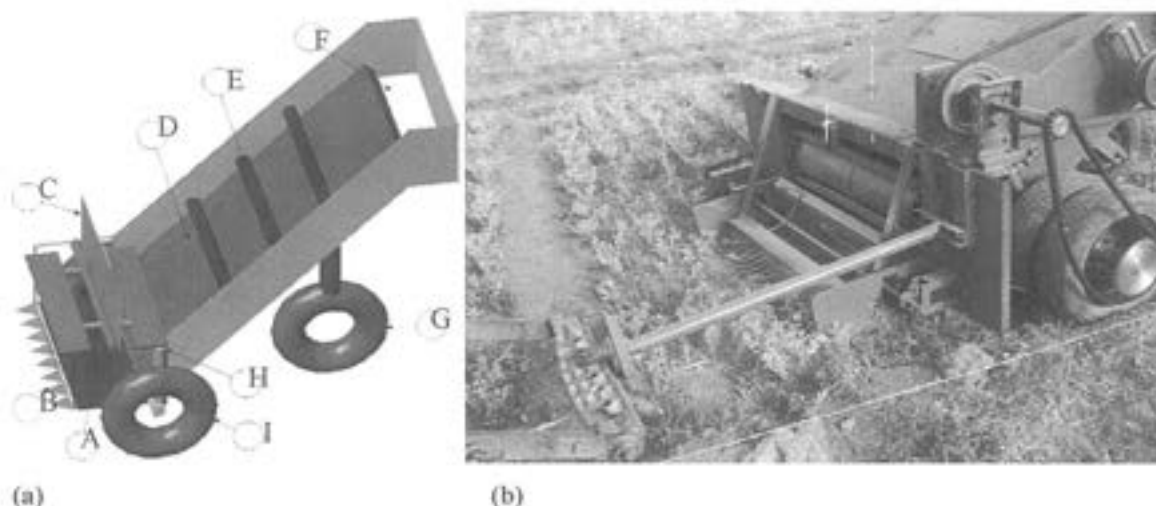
(a) 3-D model of a prototype chickpea harvester. A, platform; B, finger; C, reel; D, conveyor bottom; E, endless chain; F, sacker unit; G, steering wheel; H, adjustable screw; I, gauge wheel. (b) Tractor-pulled for chickpea stripper harvester.
